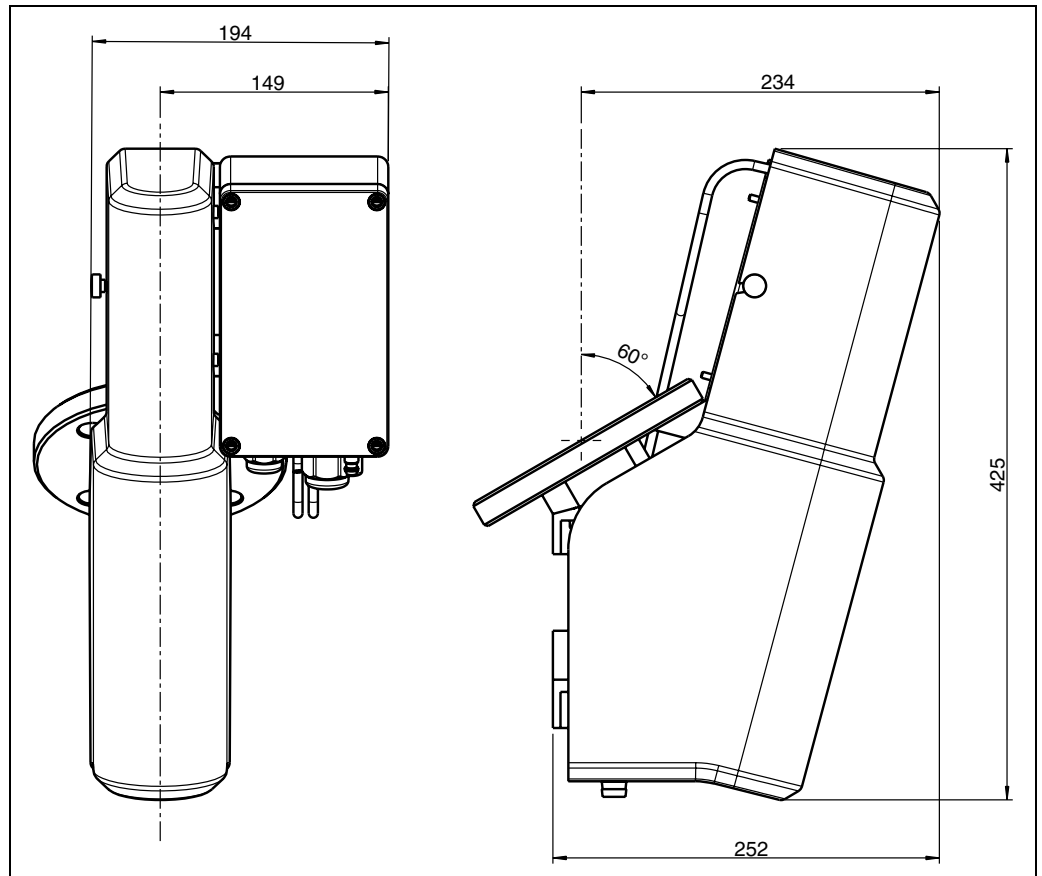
Dimensions of the ASP Inline sampler assembly with 50 ml sample volume (specifications in mm)
